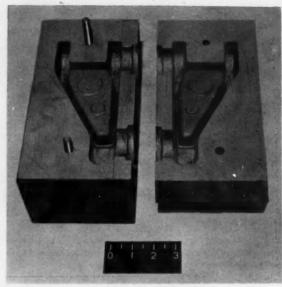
Use of shell graphite cores in machined graphite molds to prevent casting damage by cracking.
